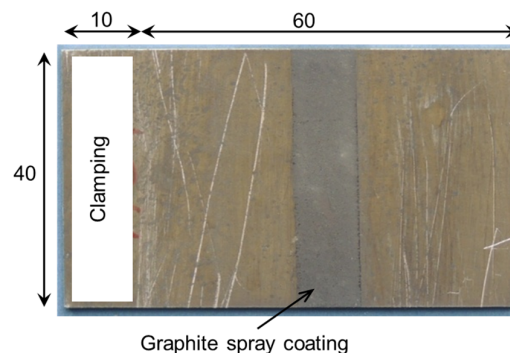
The graphite spray coated specimen for laser bending process (dimensions in mm).
